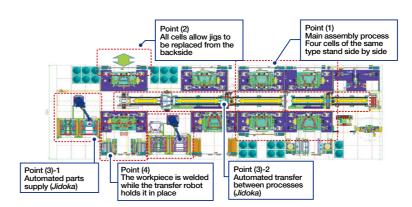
Yorozu Oita Welding Line for Serena FR MBR
